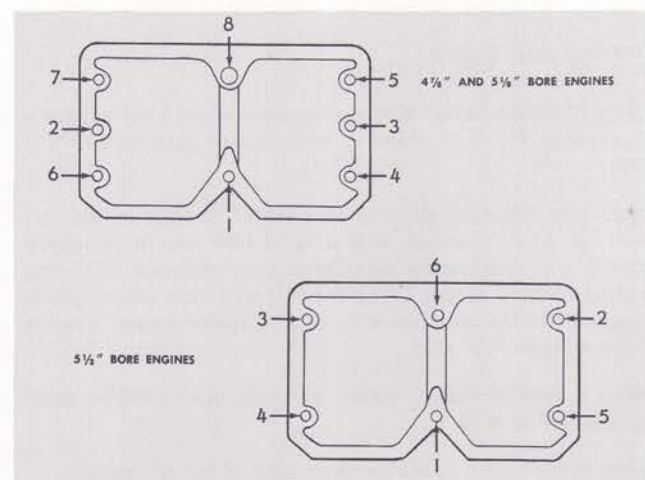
Rocker housing capscrew tightening sequence N11463
